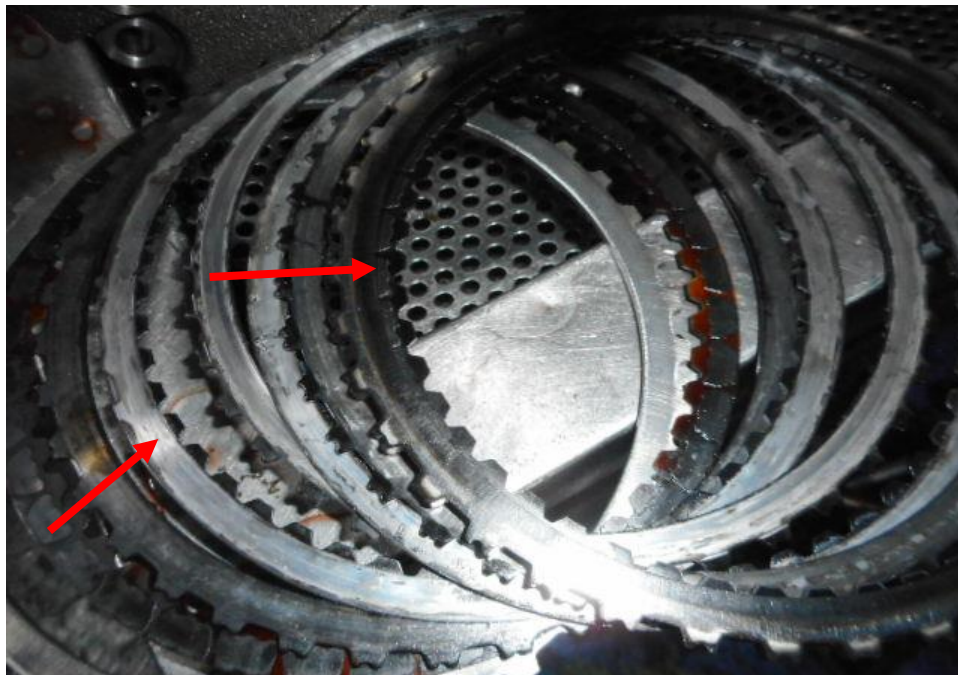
the general view of inside the gearbox unit of the Insured Vehicle at the time of our inspection. The clutch packs (arrowed) component in the gearbox unit is observed to be damaged with scratches and friction burnt marks on the surface on the clutch packs linings, this is the cause for the complained problems of the vehicle being unable to move despite shifting into gear on the Insured Vehicle.
